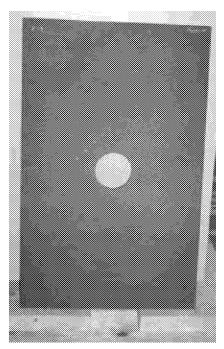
Test Specimen after Machining (Panel C1) (dimensions 15 in. × 20 in.)
